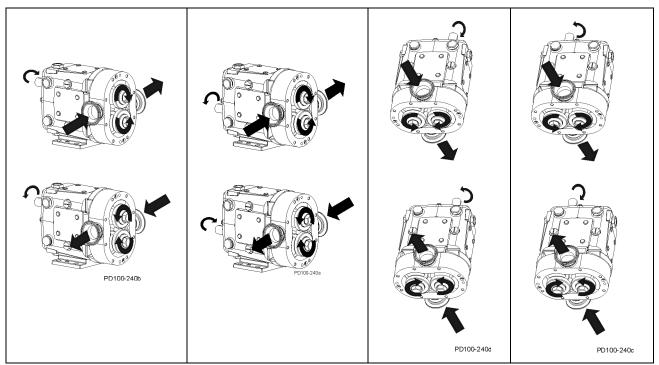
Upper Shaft Drive Flow, Lower Shaft Drive Flow and Vertical Porting Flow and Pump Rotation (Liquid End Shown)
